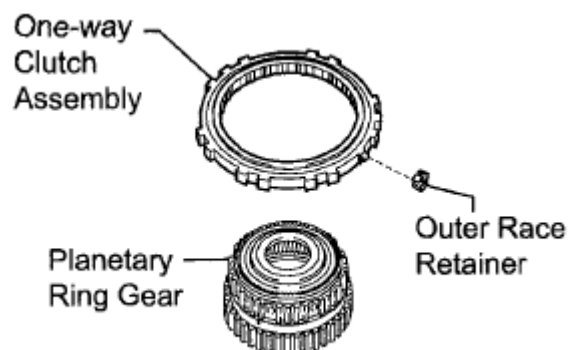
Identifying Thrust Needle Roller Bearing One-Way Clutch Assembly
